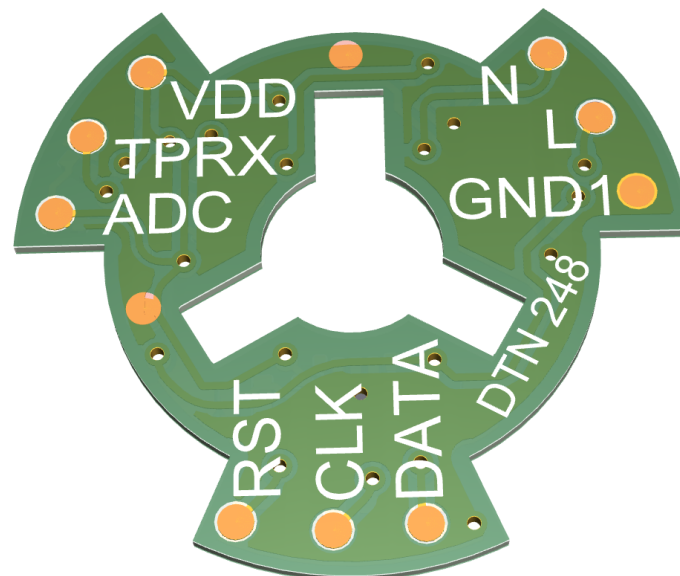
Bottom 3D view of version 1 PCB of OMP
